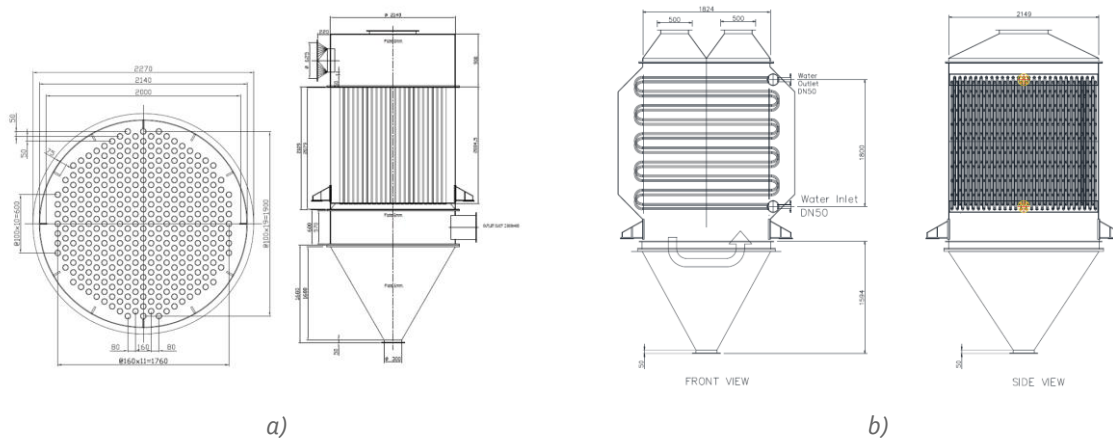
Two ECO designs for WHR from the flue gases of a coal-fired boiler: a) gas-in-tube; b) water-in-tube.
